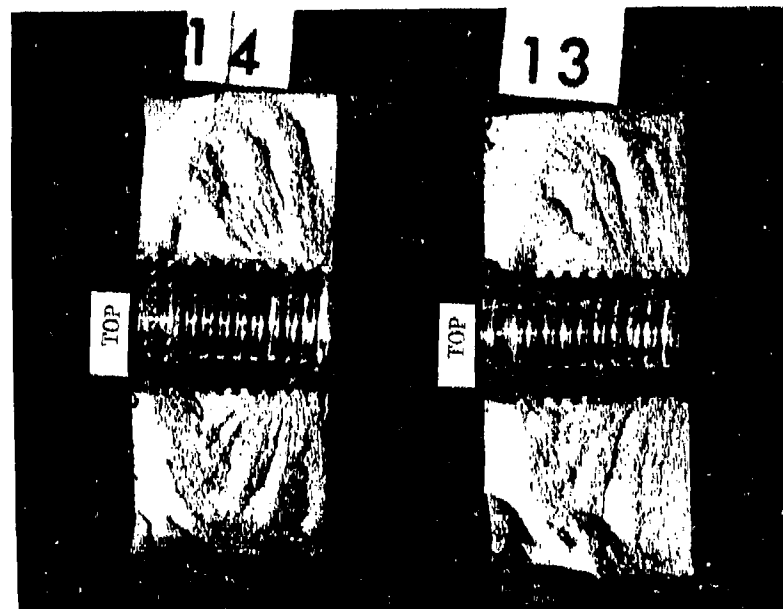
Close-up of Fatigue Failure of Specimen with Rosan and Kaynar 1/4-28 Size Inserts. Inserts Installed by AFML. Torqued Bolts in Inserts During Tests.
